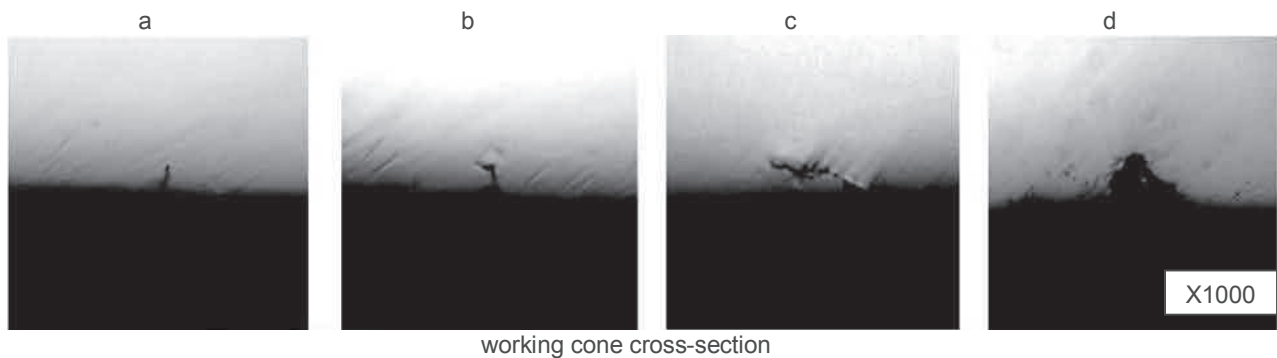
Fatigue crack-type defects on the inner surface of a tube taken from the working cone in the deformation zone during the rolling on the KPW pilger rolling mill
